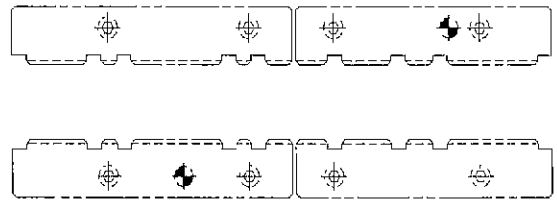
A drawing of the guide plate of internal leads generated in the die layout module
